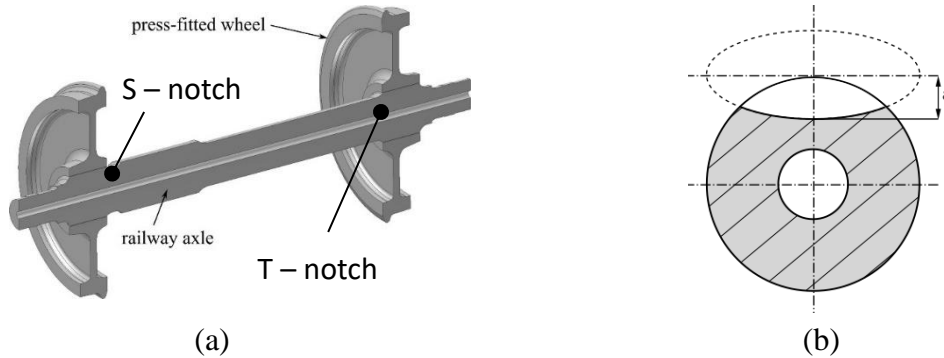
Investigated railway axle [3] (a), considered semi-elliptical crack shape front (b)
